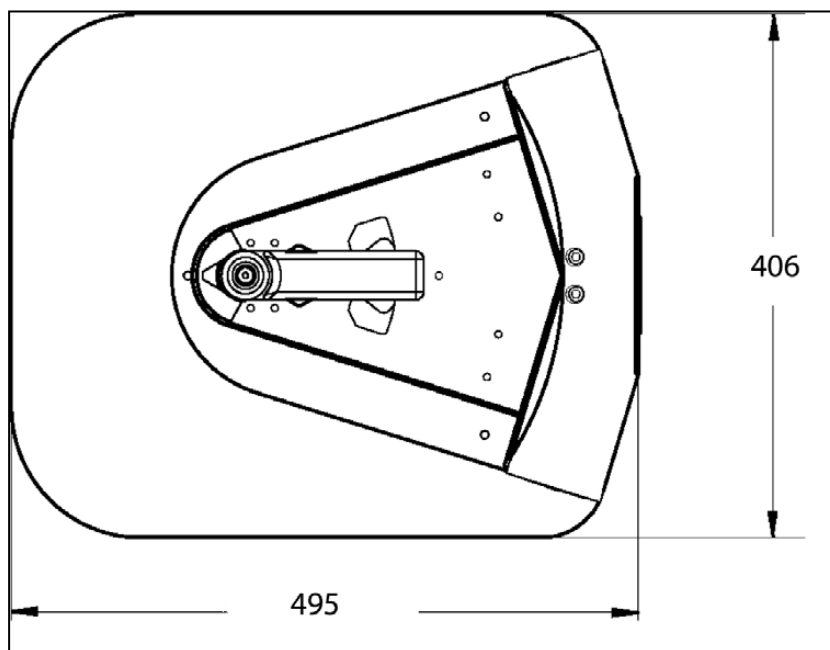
Docking Station Floor Plate Dimensions (units are mm)
